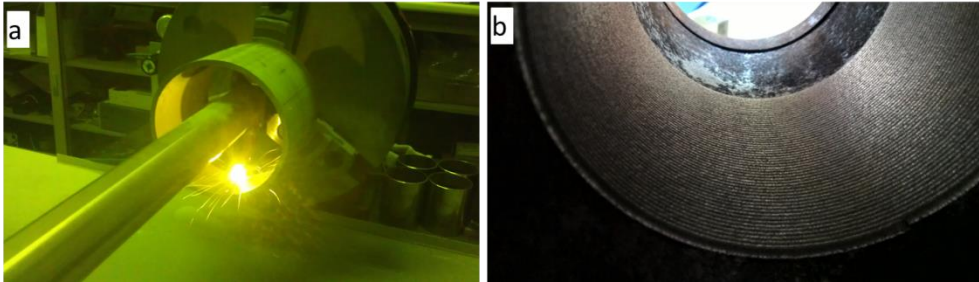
(a) Photo of LAAM process for deposition of Inconel 625 to AISI 4130 inner-surface and (b) Top-view of the surface of the deposited Inconel 625
